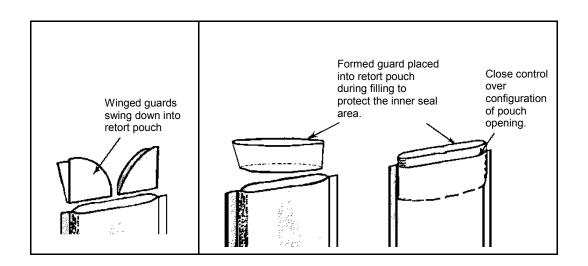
Two Styles of Guards for Filling Retort Pouches
